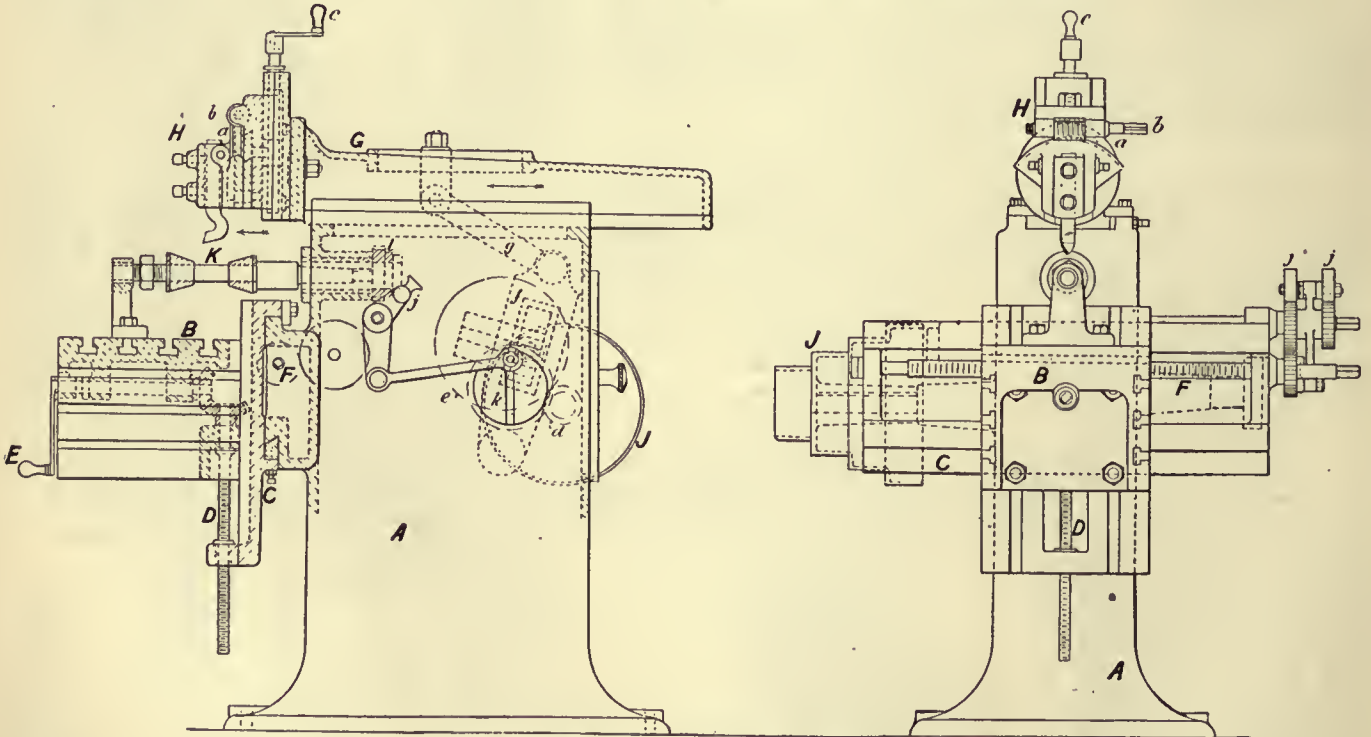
8-in. Shaping Machine. (Cunliffe & Croom, Ltd., Manchester.)
